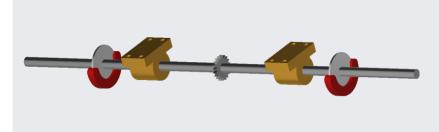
Dual disk brake, solid rear axle driveshaft.
